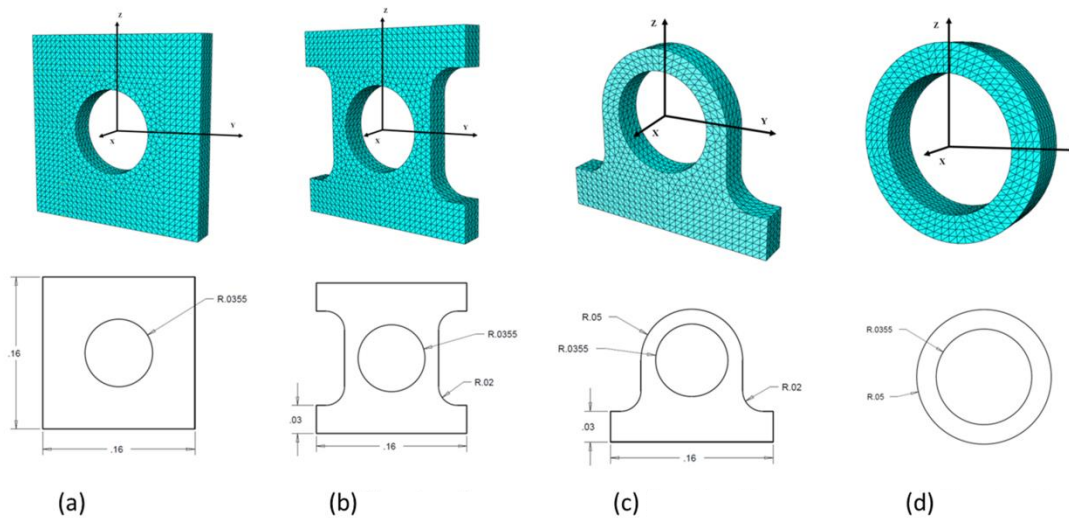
Geometries and dimensions of housing supports (a) Housing A. (b) Housing B. (c) Housing C. (d) Housing D.
